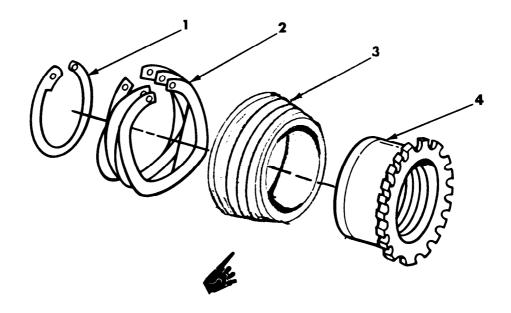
Barrel Nut Assembly (8448552) (Group 0303).
